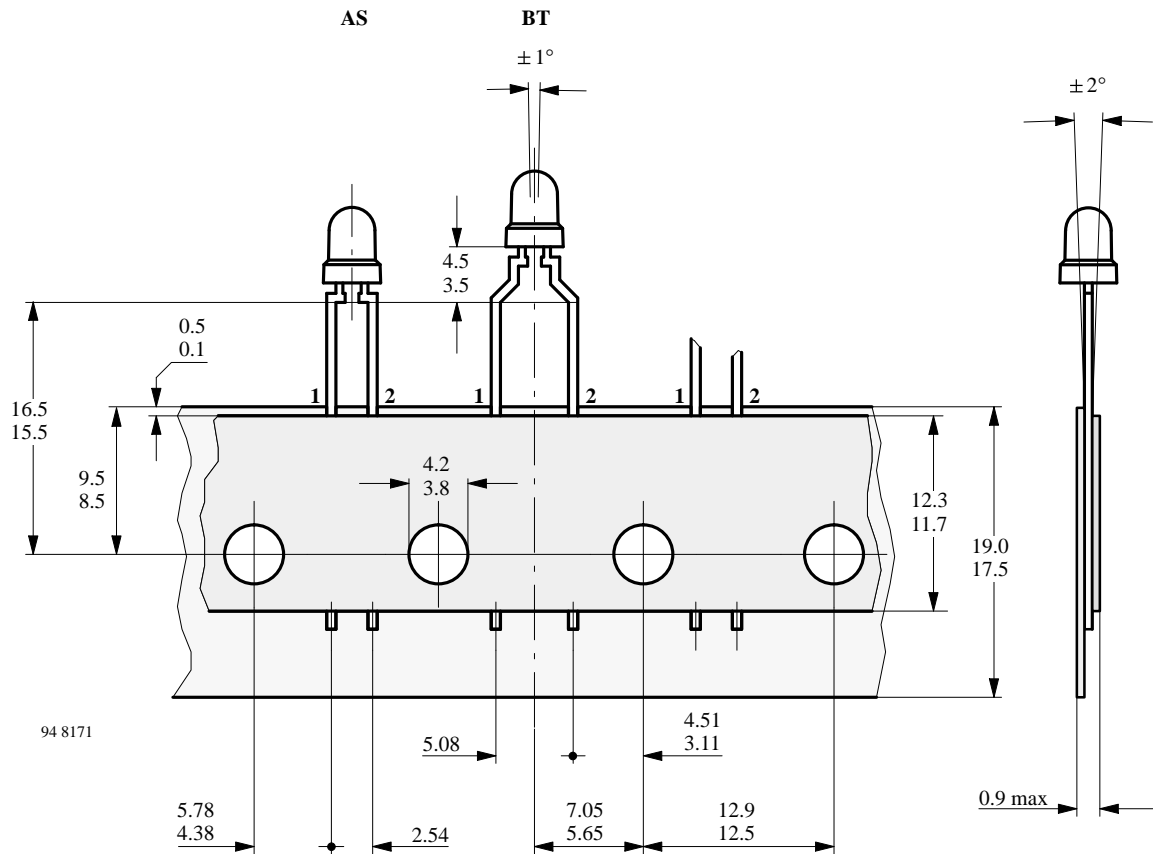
Tape dimensions  $\varnothing$  3mm devices
